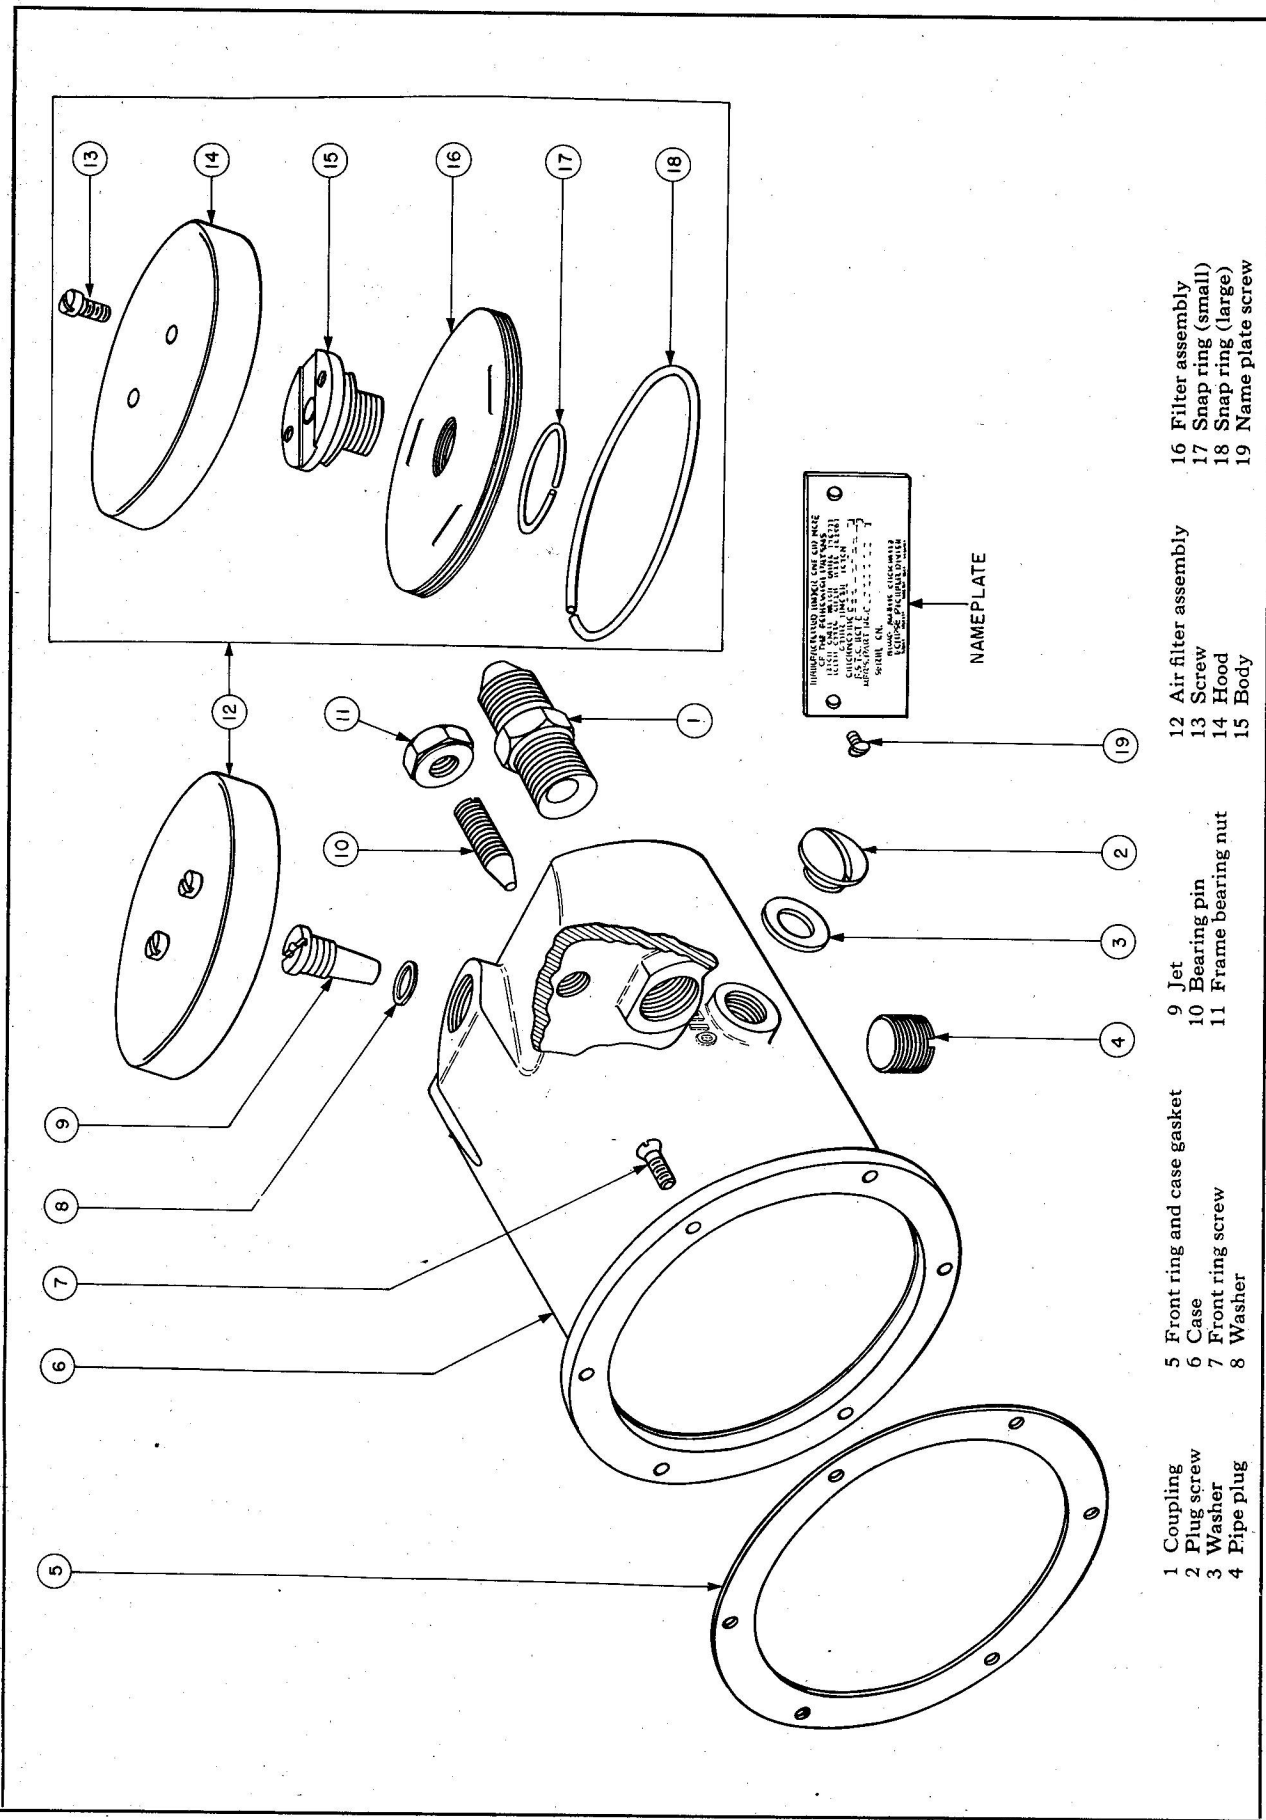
Exploded View Drawing—Case Assembly—Navy Types FSSC 18-1-462 (Pioneer Type 1713-1Y-A1), FSSC 88-1-3280 (Pioneer Type 1719-1AF-A1), and FSSC 88-1-3281 (Pioneer Types 1719-1AN-A1 and 1719-1AQ-A3).
